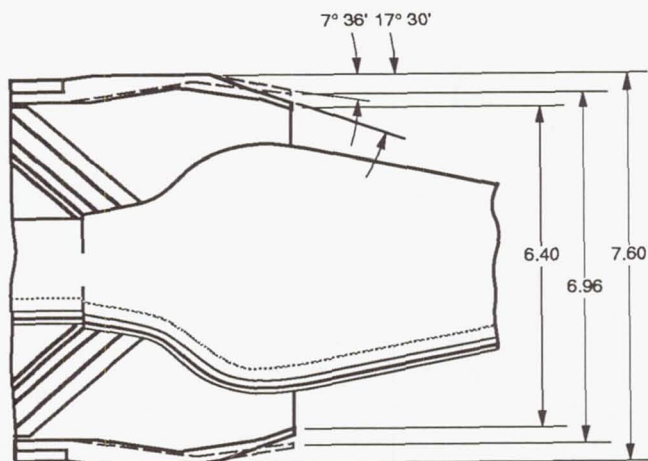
Iris primary nozzle. (Linear dimensions are in inches.)
